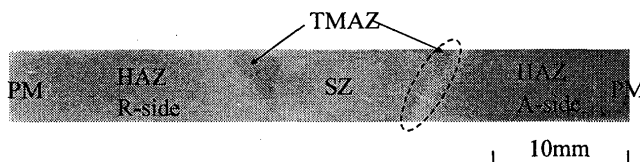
Macroscopic appearance near weld zone (1200-200).
